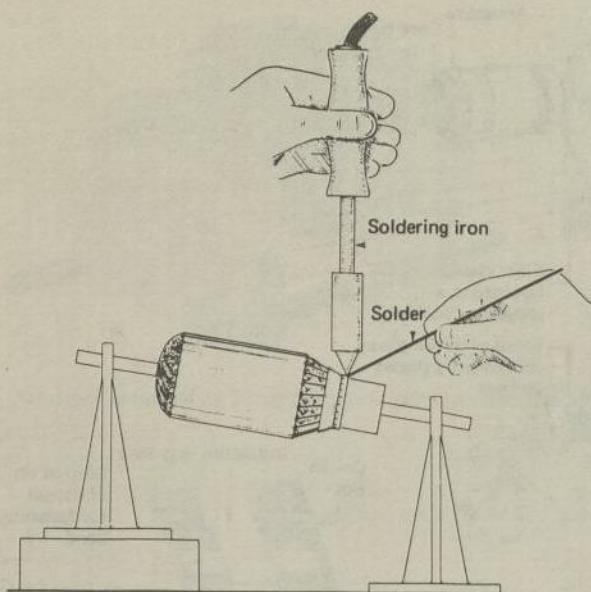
Holding the iron vertically prevents the solder from spanning two bars.
